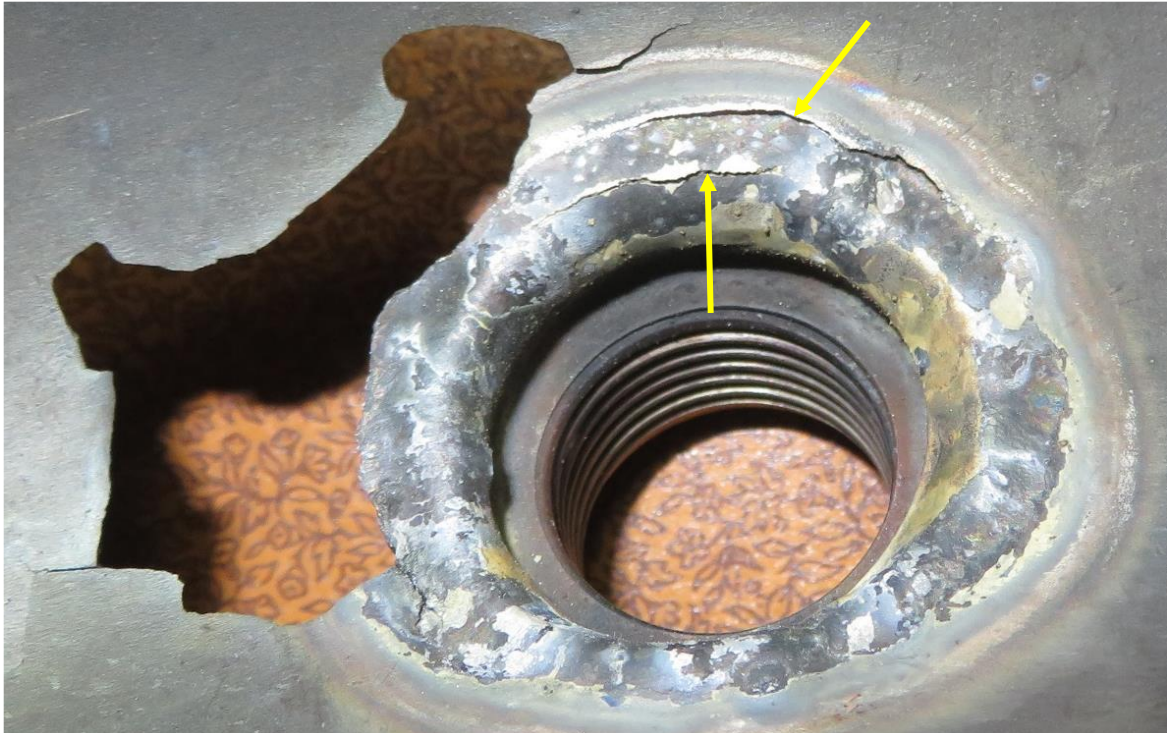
Closer view of the inside of the duct showing the multi-coloured flaky surface layer on the duct surface below the external weld. Note the open and through thickness crack associated with the toe of the weld as indicated by the top arrow. In addition, one of the original cracks that was weld-repaired is indicated by the bottom arrow. The second crack on the opposite side of the throat is not visible due to the angle of the image.
